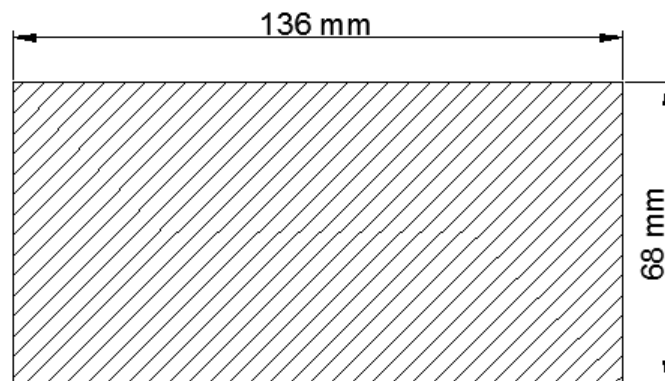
Panel Cut Out Dimensions of SK 3400 Modulating Level Controller
